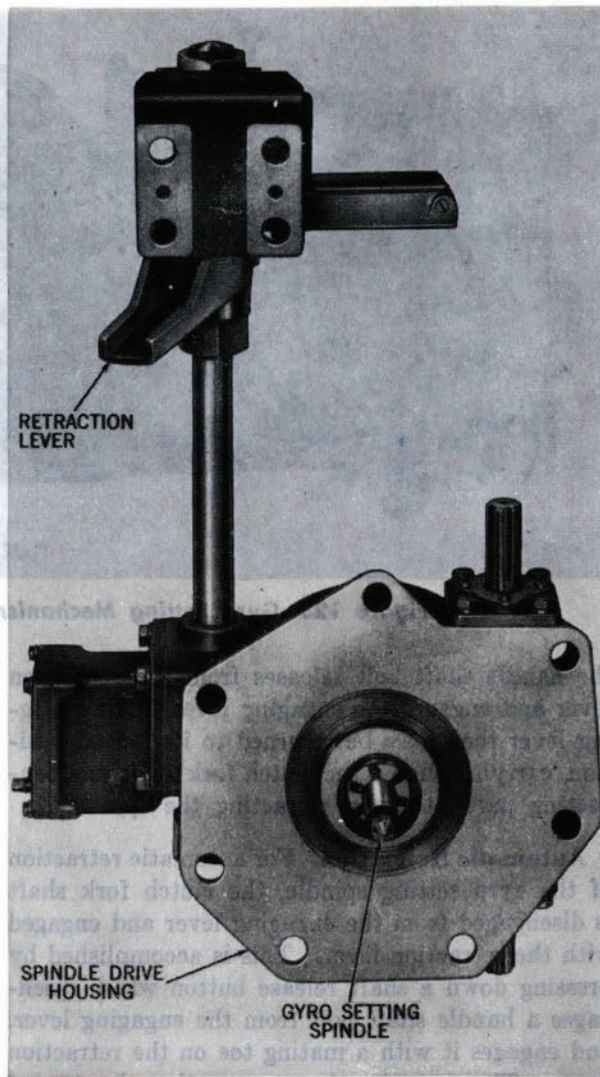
Tube and Retraction Units Removed From Tube—Tube Side.
